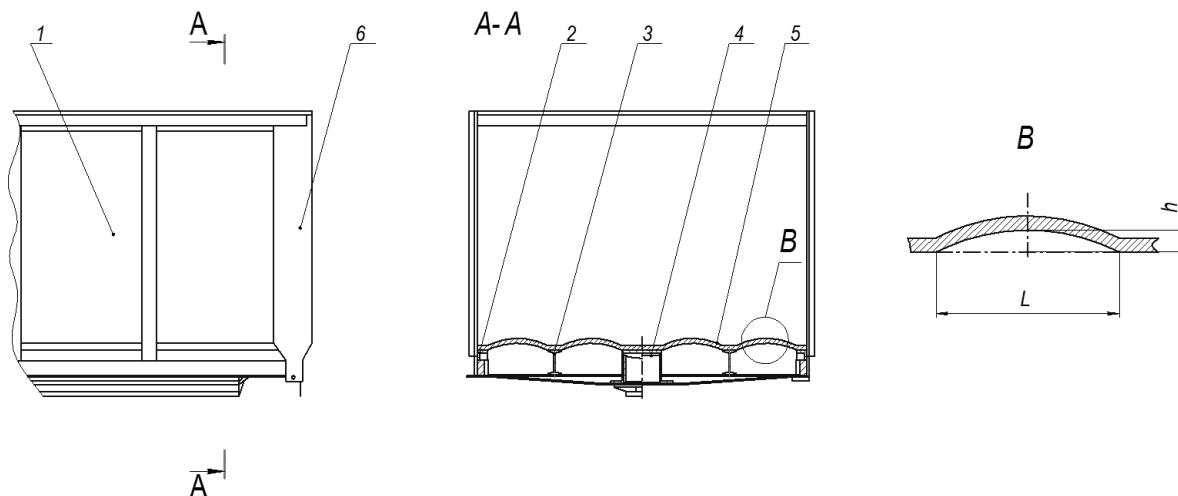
Proposed design of the RCB: 1 – side wall; 2 – extreme supporting beam; 3 – intermediate supporting beam; 4 – spinal beam; 5 – floor; 6 – end wall.
